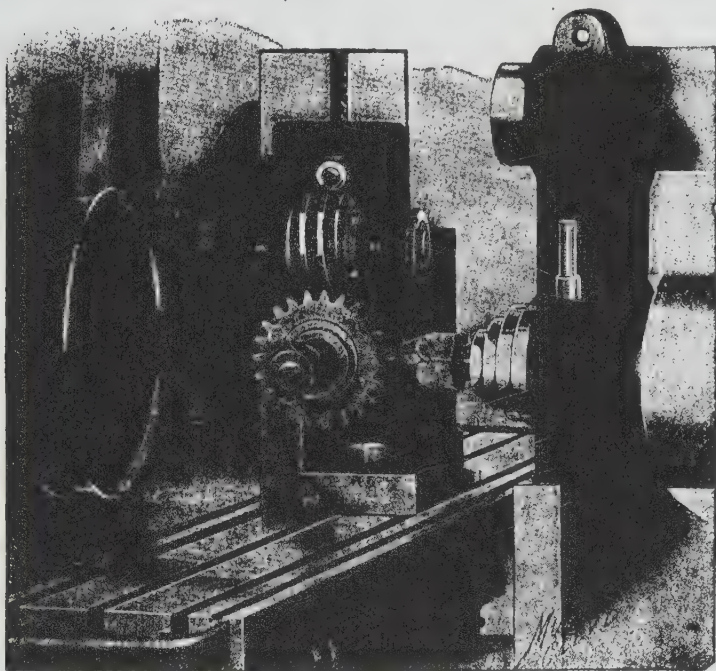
“LONG ARM” TOOTH CHAMFERING ATTACHMENT.
